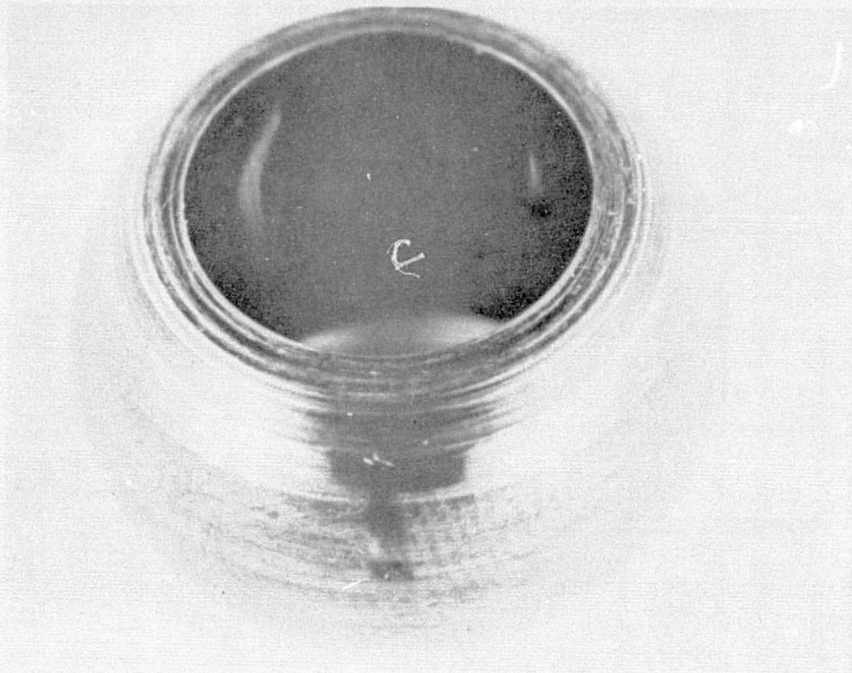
Unbroken Design C Ball Removed from Bearing at Completion of Test. Ball Shows Severe Contact with Cage Pocket Restraints.
